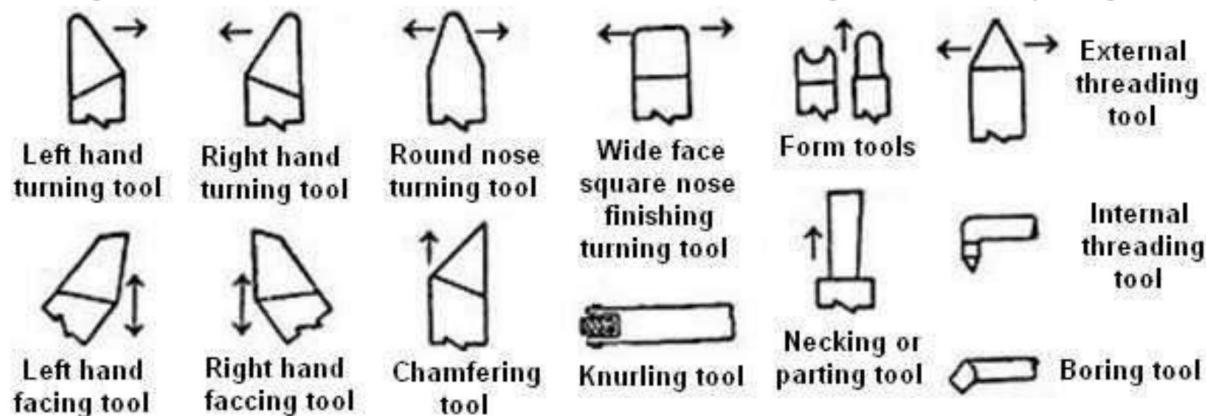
Various tools used in centre lathe according to the method of using the tool
